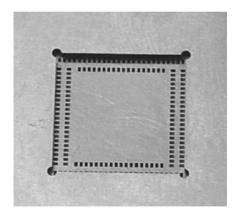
CSP Replacement Part with Solder Ball Addition Prior to Reattachment on PCB
